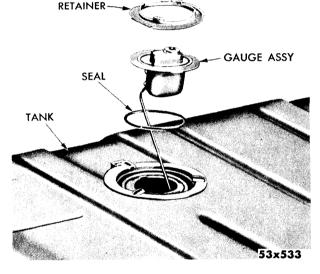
Removing and Installing Fuel Gauge (Tank Unit)
